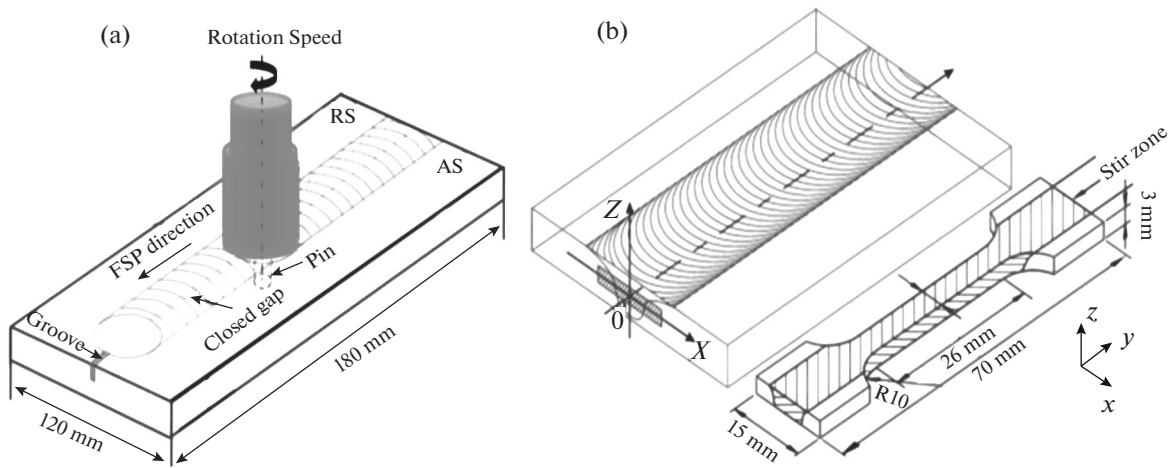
Schematic drawing of (a) the process of FSP in stir zone and (b) tensile testing sample.
